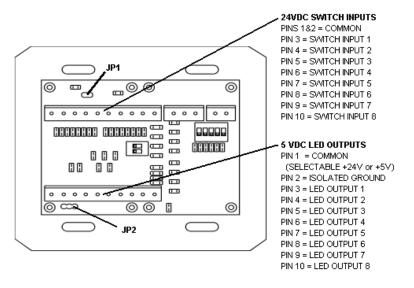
Detail for connecting the Smart Switch Terminal to the MCP Network
